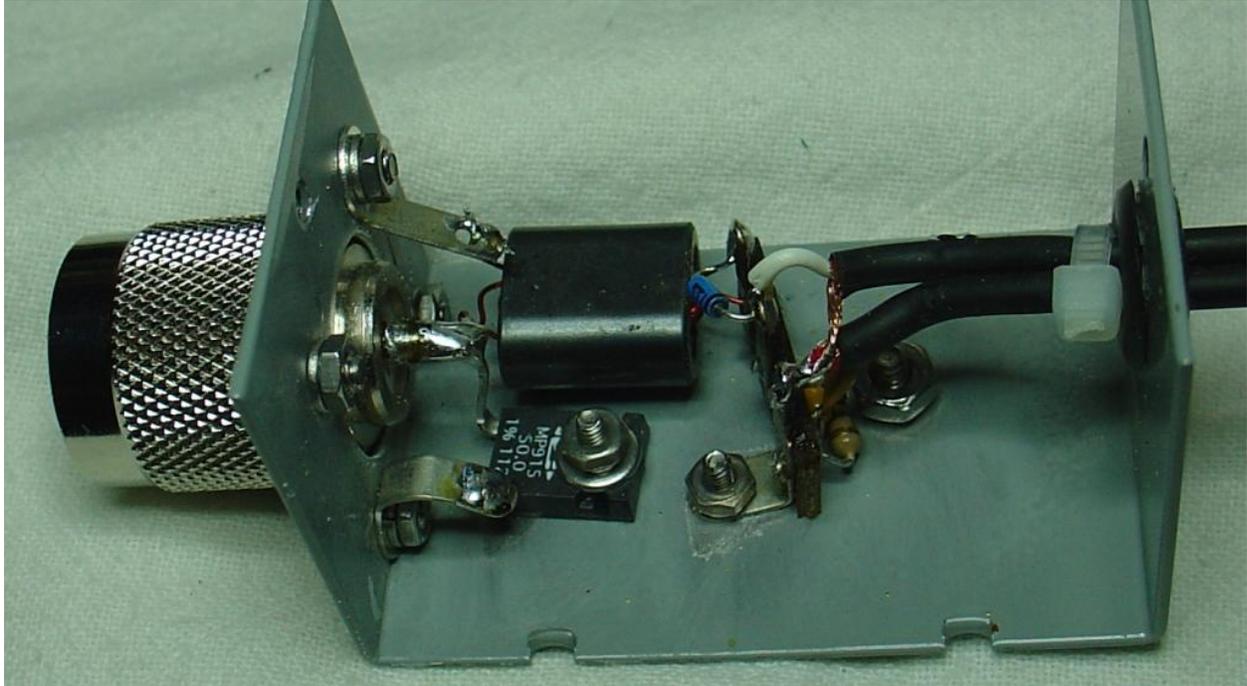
Internal detector wiring. The transformer ground is on the upper solder lug, the 5-turn tap solders to the connector center pin, and the 5-1/2 turn output solders to the diode anode.
